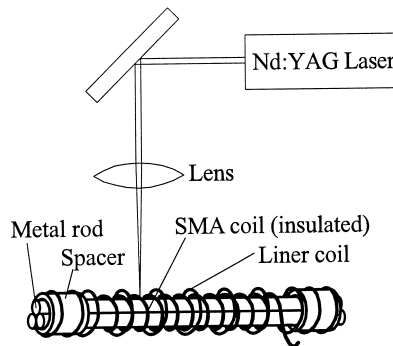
Removing of insulator on SMA coil by YAG laser.
